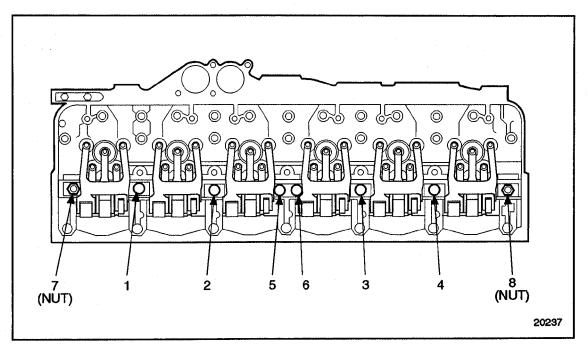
Rocker Arm Shaft Retaining Bolt and Nut Tightening Sequence
